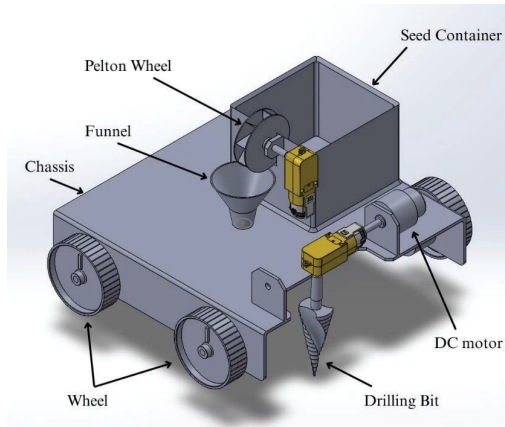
Isometric CAD model of the final seed sowing robot design.
